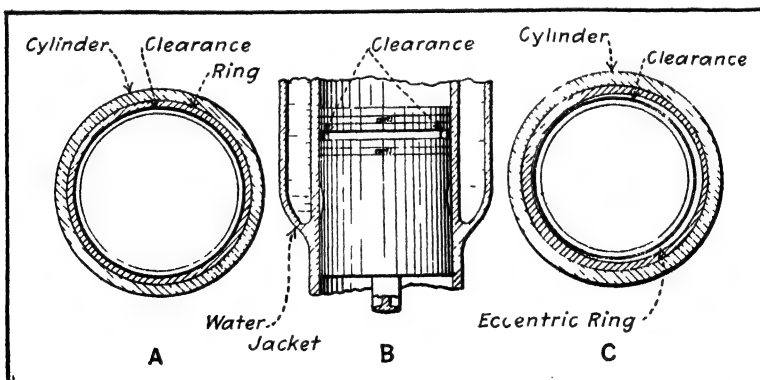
Diagrams Showing Advantages of Concentric Piston Rings. A—Note Uniform Clearance Between Back of Ring and Piston Groove with Concentric Ring. B—Sectional Diagram Showing Location of Clearances Between Inside of Ring and Bottom of Piston Grooves. C—Lack of Uniformity in Clearance Space When Eccentric Rings are Used.
